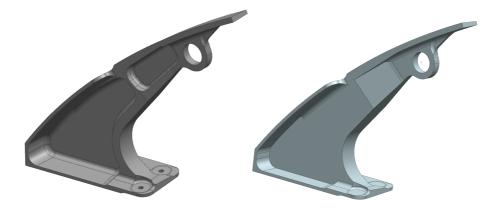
Door Connection Joint; 1) Original part and 2) Design space
